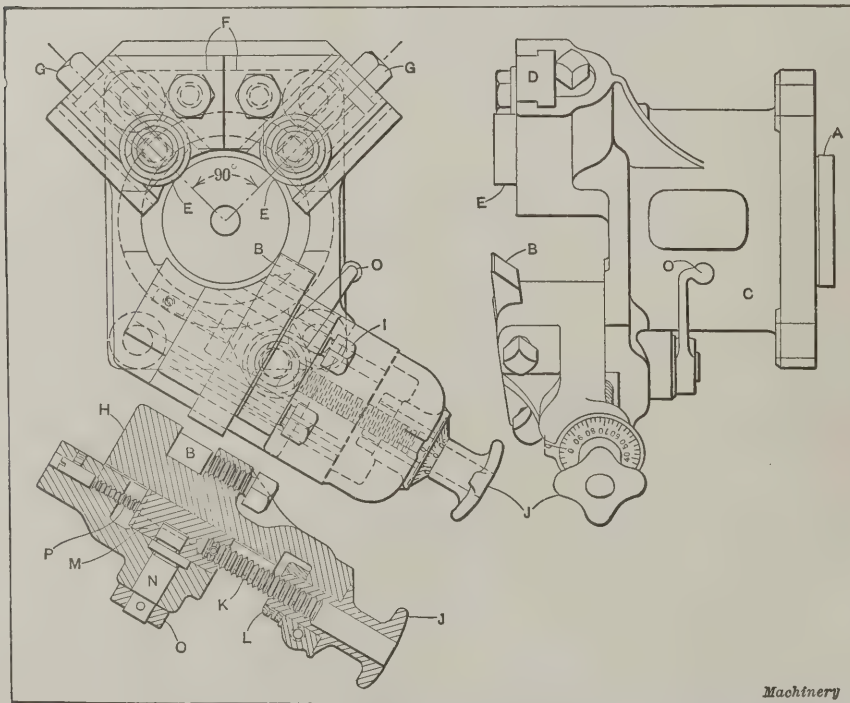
Construction of the Bar Turner shown in Fig. 1, showing how the Turning Tool is withdrawn from the Work when retreating
